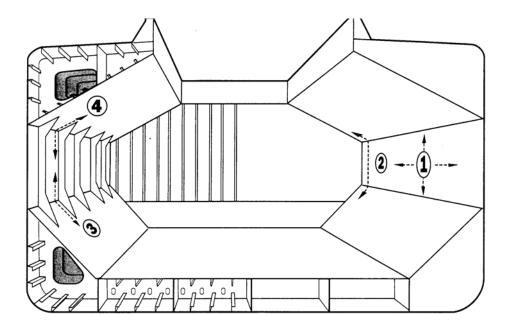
Typical fracturing at the connection of a transverse bulkhead structure
